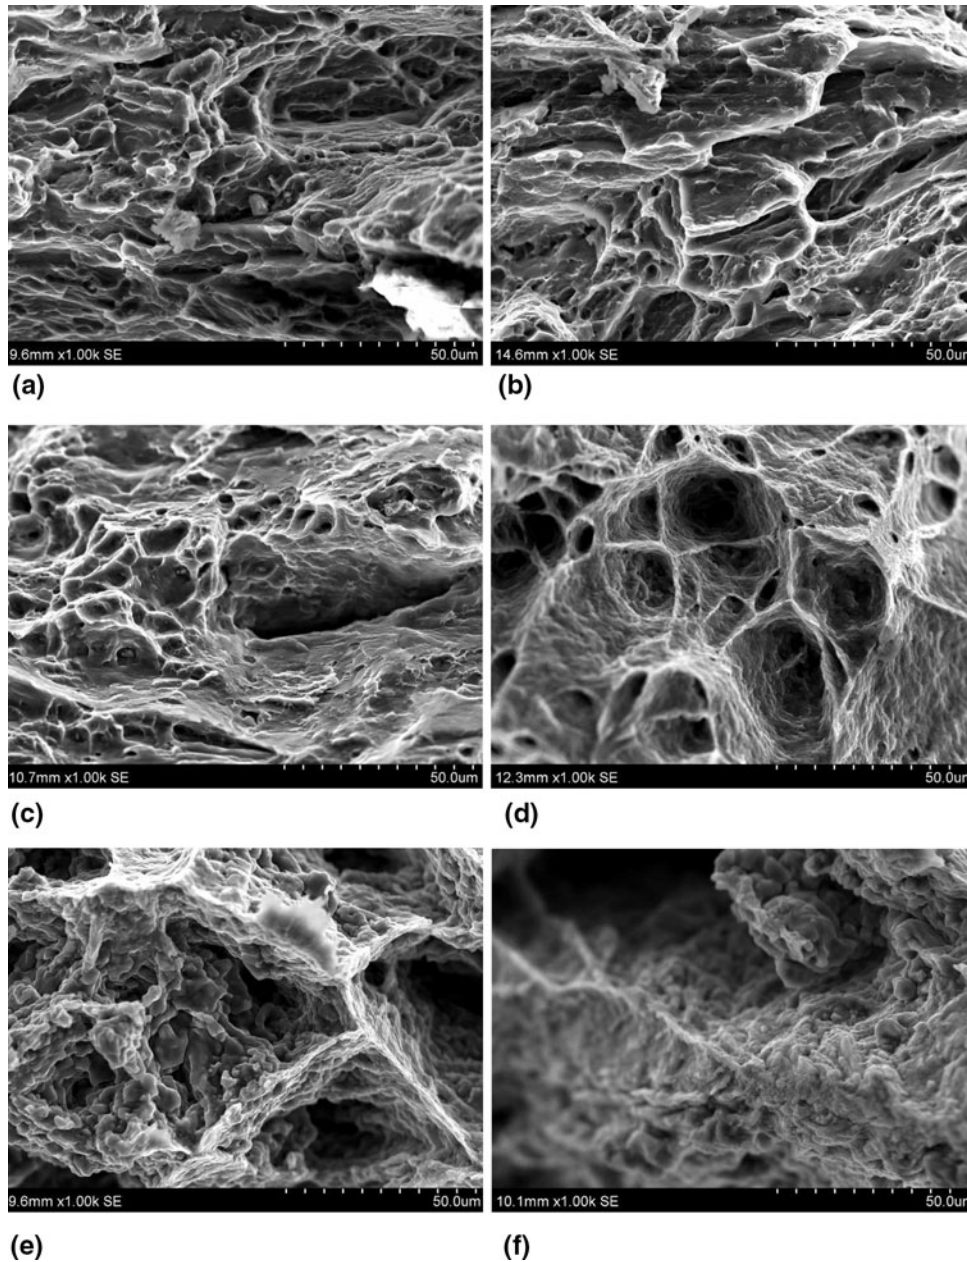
SEM images of tension fracture at different temperatures. (a) RT; (b) 120 °C; (c) 160 °C; (d) 330 °C; (e) 420 °C; (f) 480 °C
